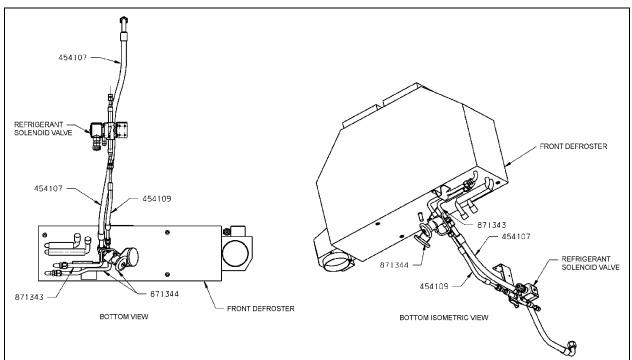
VIEW OF INSTALLATION – FRONT SECTION
